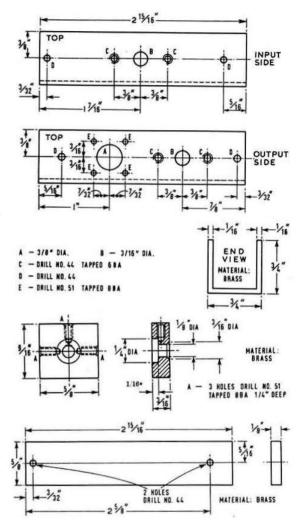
(a) The tunnel diode amplifier line main body, cut from $\frac{3}{4}$ in. equal sided brass channel. (b) Centre line end support plate, which should be brazed into position in trough. The dimensions and drilling for the capacitor (feed-through) plate are the same, with the exception that the centre hole is $\frac{10}{4}$ in. diam. drilled right through. The 1000 pF feed-through capacitor, preferably the type having a slot in one end to accept the diode leads, is soldered into the hole. This end plate must not be soldered into the trough. (c) Cover.
